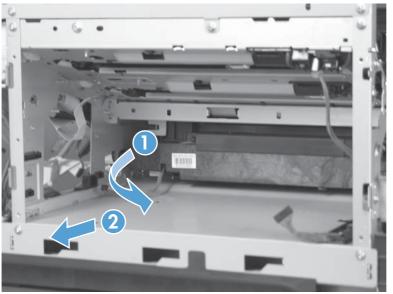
Remove the laser/scanner assembly (C/Bk) (7 of 7)
